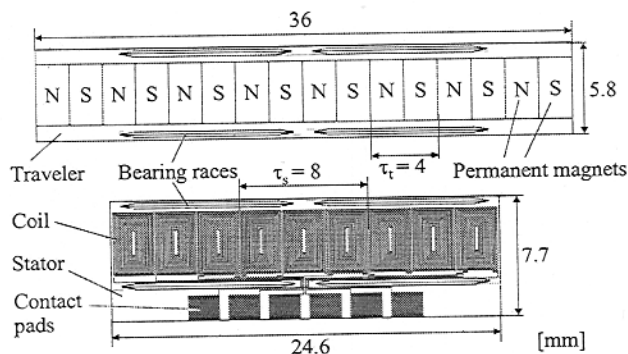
Lateral dimensions of the linear synchronous micromotor with ball bearing
